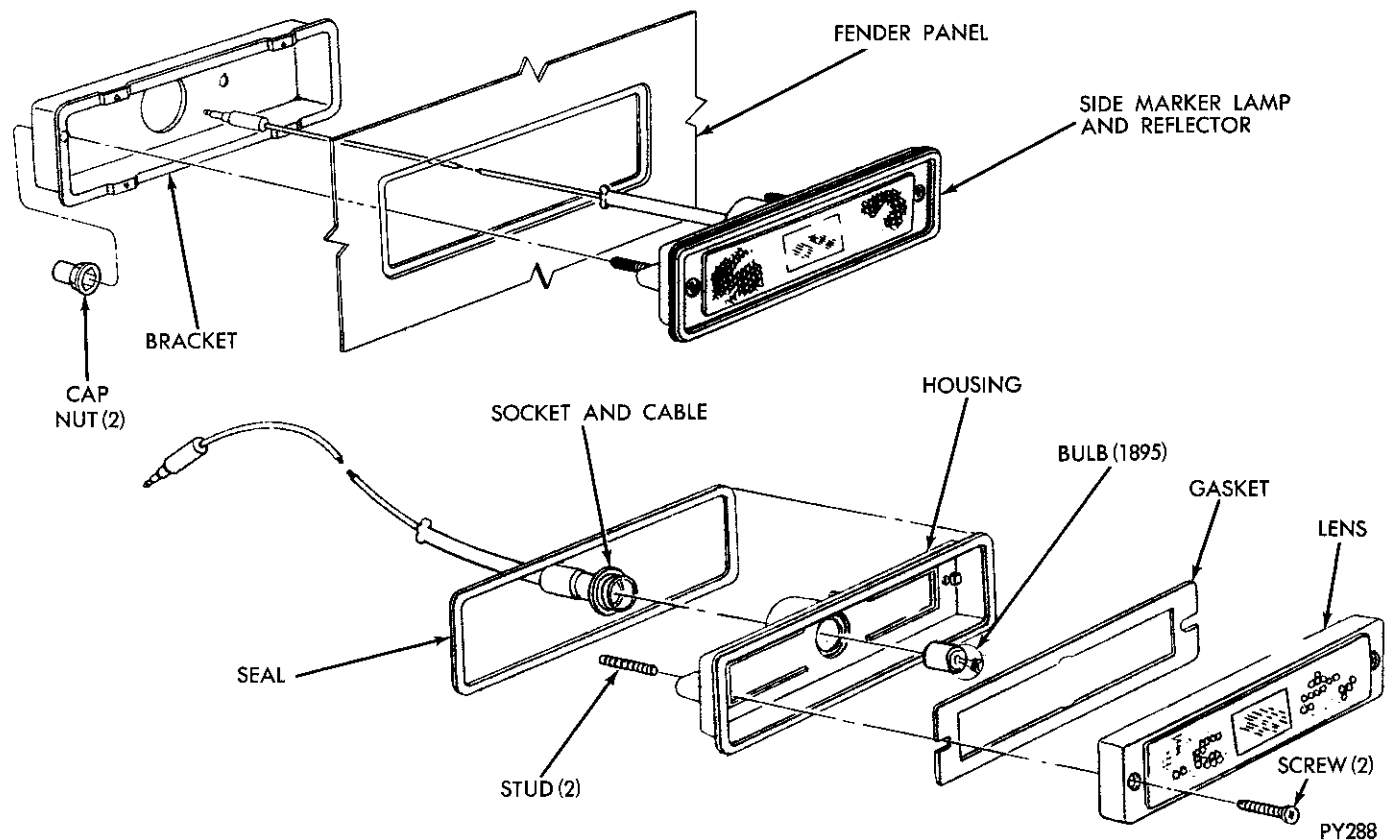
Front Fender Side Marker Lamp and Reflector—Chrysler
